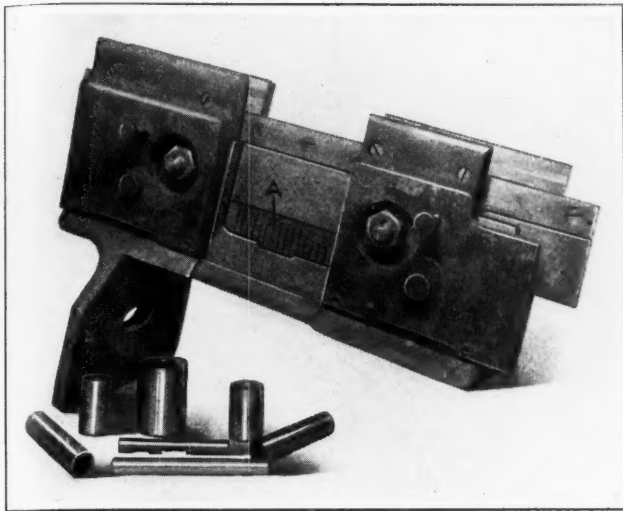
Typical Cylindrical Work for the Centerless Grinder and Fixture used to guide Work of this Class
